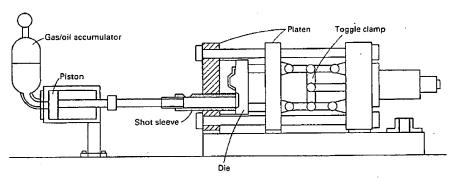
Schematic showing the principal components of a cold chamber die casting machine
